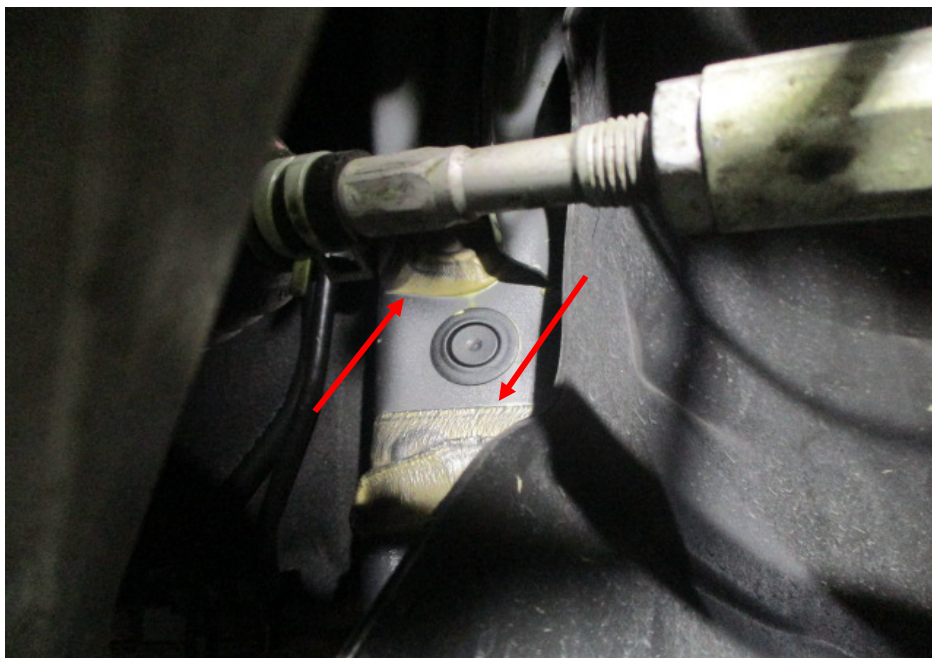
shows the chassis/structural body at the underside front left of the Motor Car. I did not find any weld marks other than original spot weld marks on the chassis/structural body of the Motor Car. The original factory sealant (arrowed) at the joints along the chassis/structural body was untouched, indicating no work was done on the chassis/structural body of the Motor Car and that the chassis/structural body was originally fitted.
